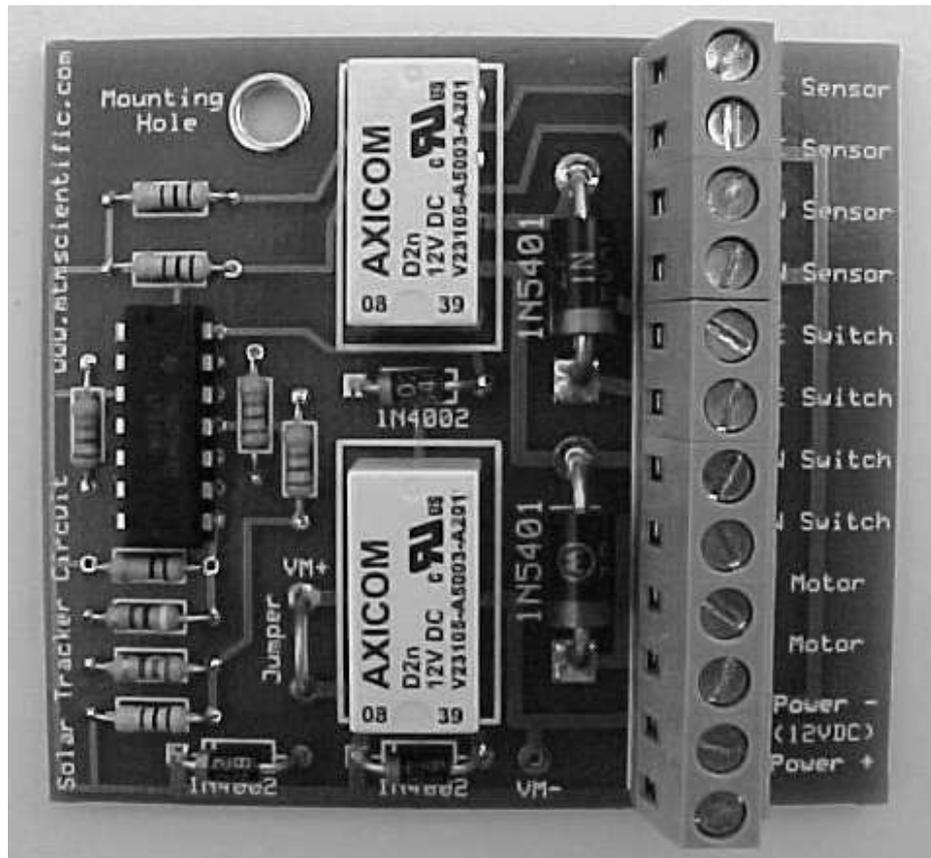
Photograph of the assembled Solar Tracker circuit board kit.
